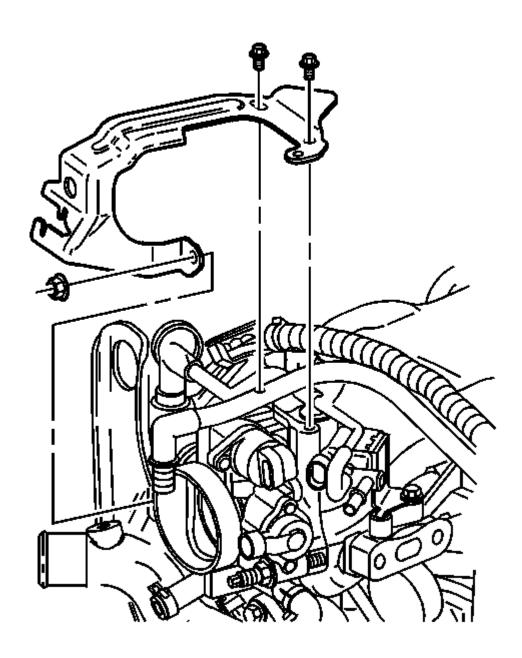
Removing Accelerator Cable Bracket Courtesy of GENERAL MOTORS CORP.
